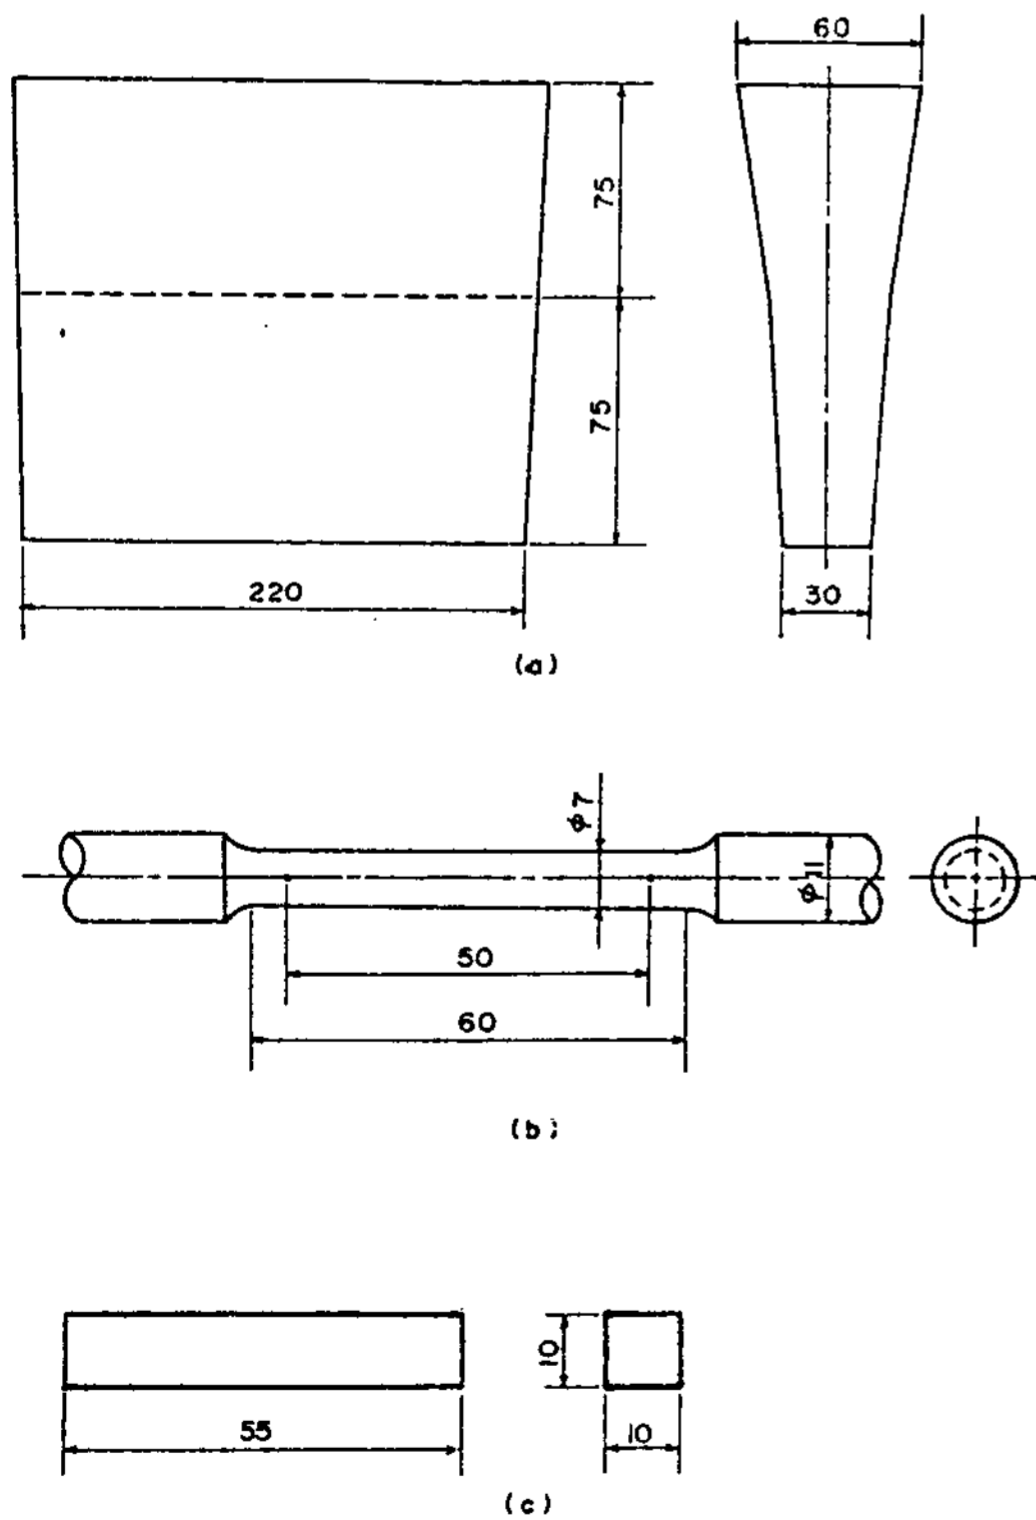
Dimension of (a) Y-Block, (b) Tensile Test Specimen and (c) Charpy Impact Specimen. (unit : mm)
